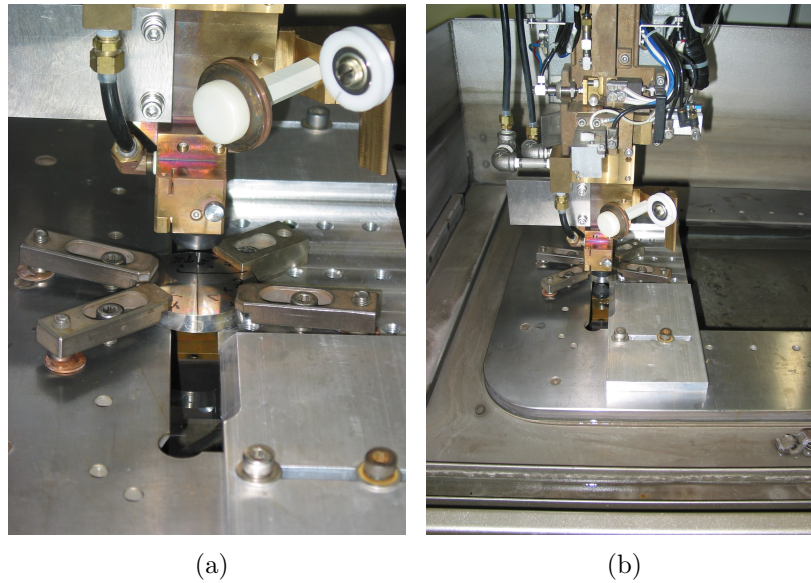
316L disk and the clamping fixture to execute the cut on the EDM machine.
